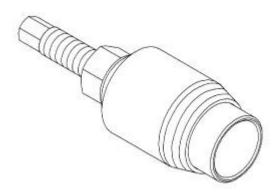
REMOVER, SEAL - 9071 Courtesy of CHRYSLER LLC
